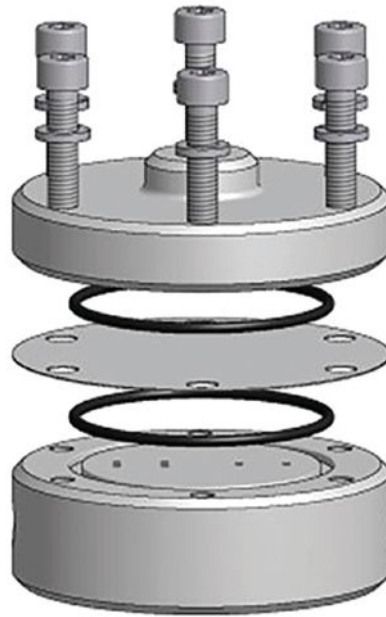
Exploded view of a direct-sealing diaphragm valve showing cap, O-rings, diaphragm and body with field of parallel orifices. Photo credit: Equilibar
